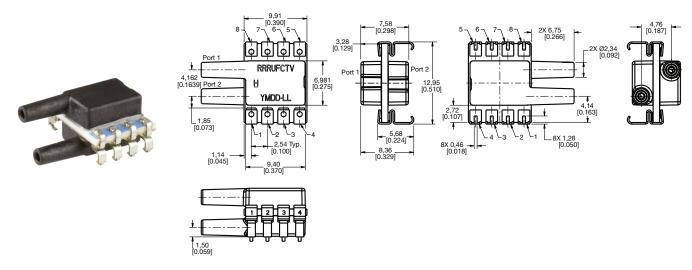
SMT PACKAGE DIMENSIONAL DRAWINGS (CONTINUED)
